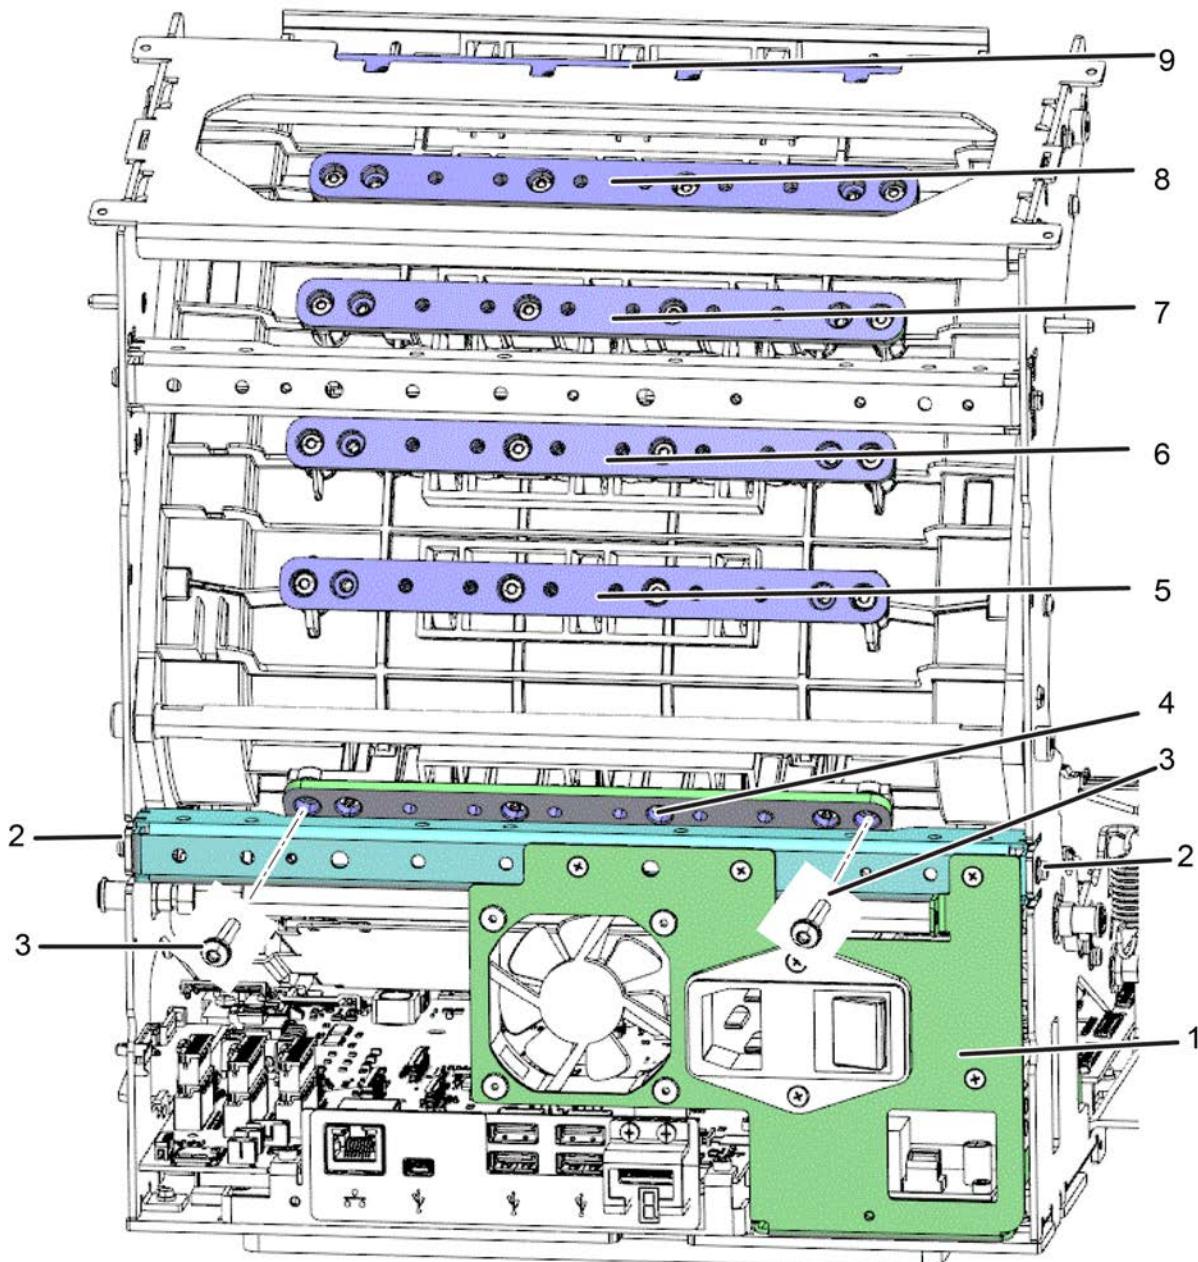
Guide Roller Assembly Removal (3R 20 MM)
